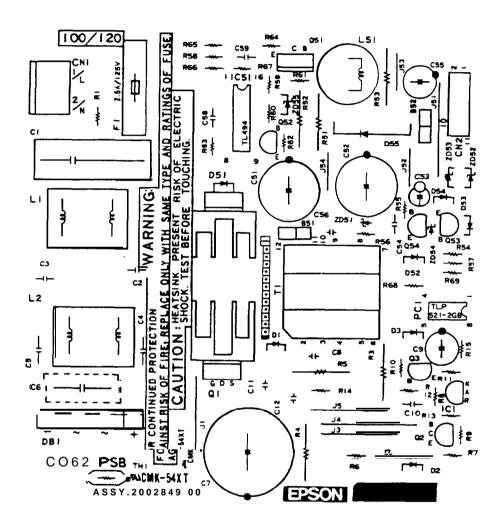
BOARD ASSY., POWER SUPPLY (C062 PSB BOARD) Component Layout
